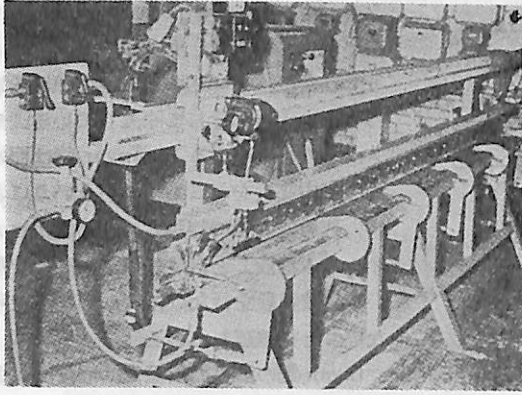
Mechanized welding of longitudinal fillet welds in Invar strakes (文献 iii)
